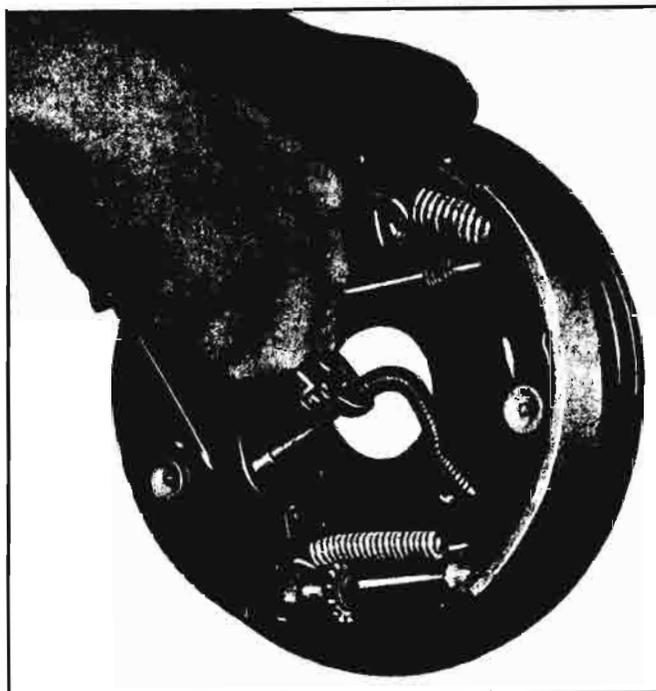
Removing Parking Brake Cable (Axle Removed for Clarity)
